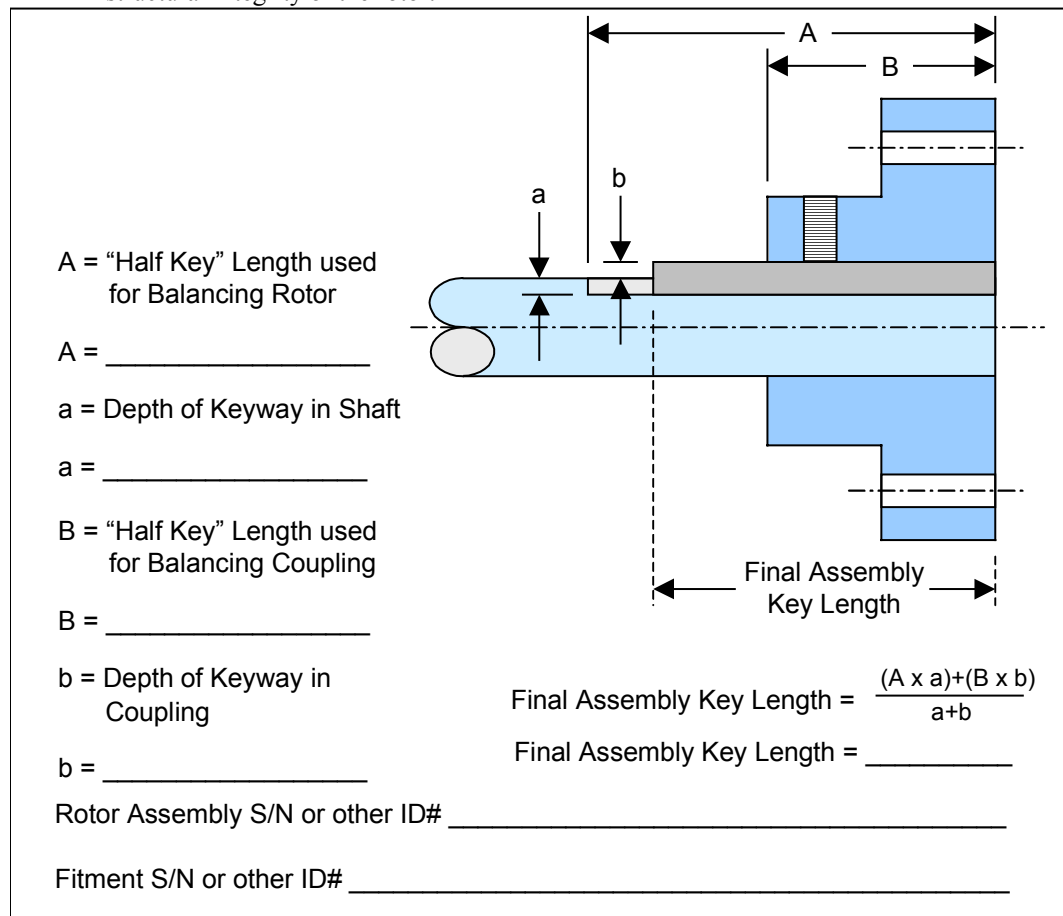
Balance Test Key Dimensions for Steel Key and Coupling
